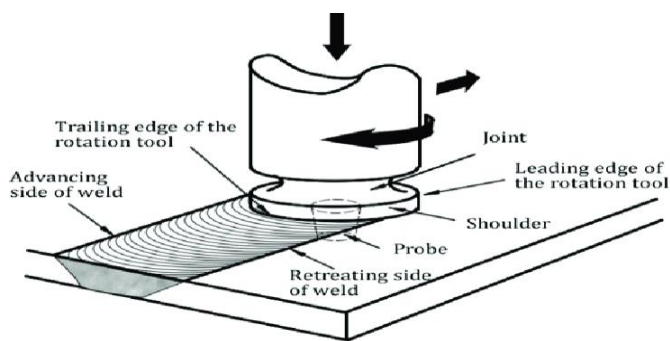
Typical Butt-joint welding methodology by a turning shoulder.
